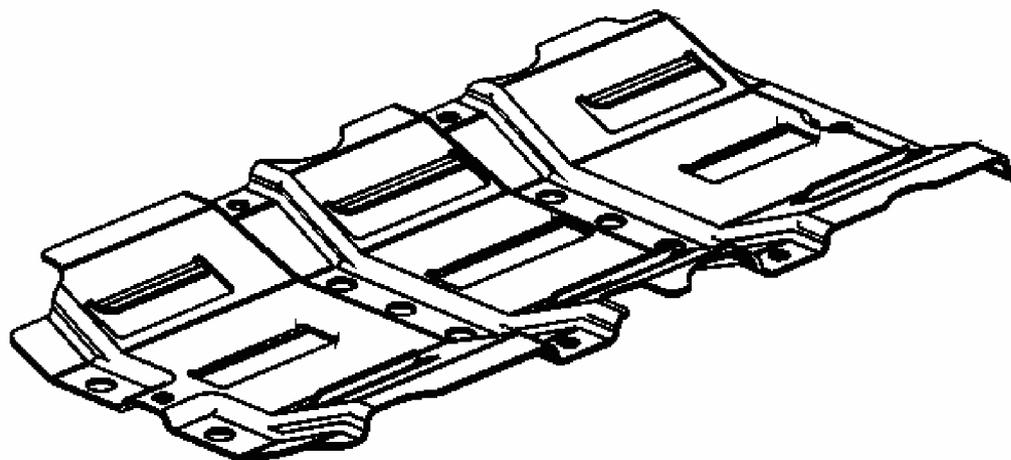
Inspecting Oil Pan Baffle Scraper For Damage
